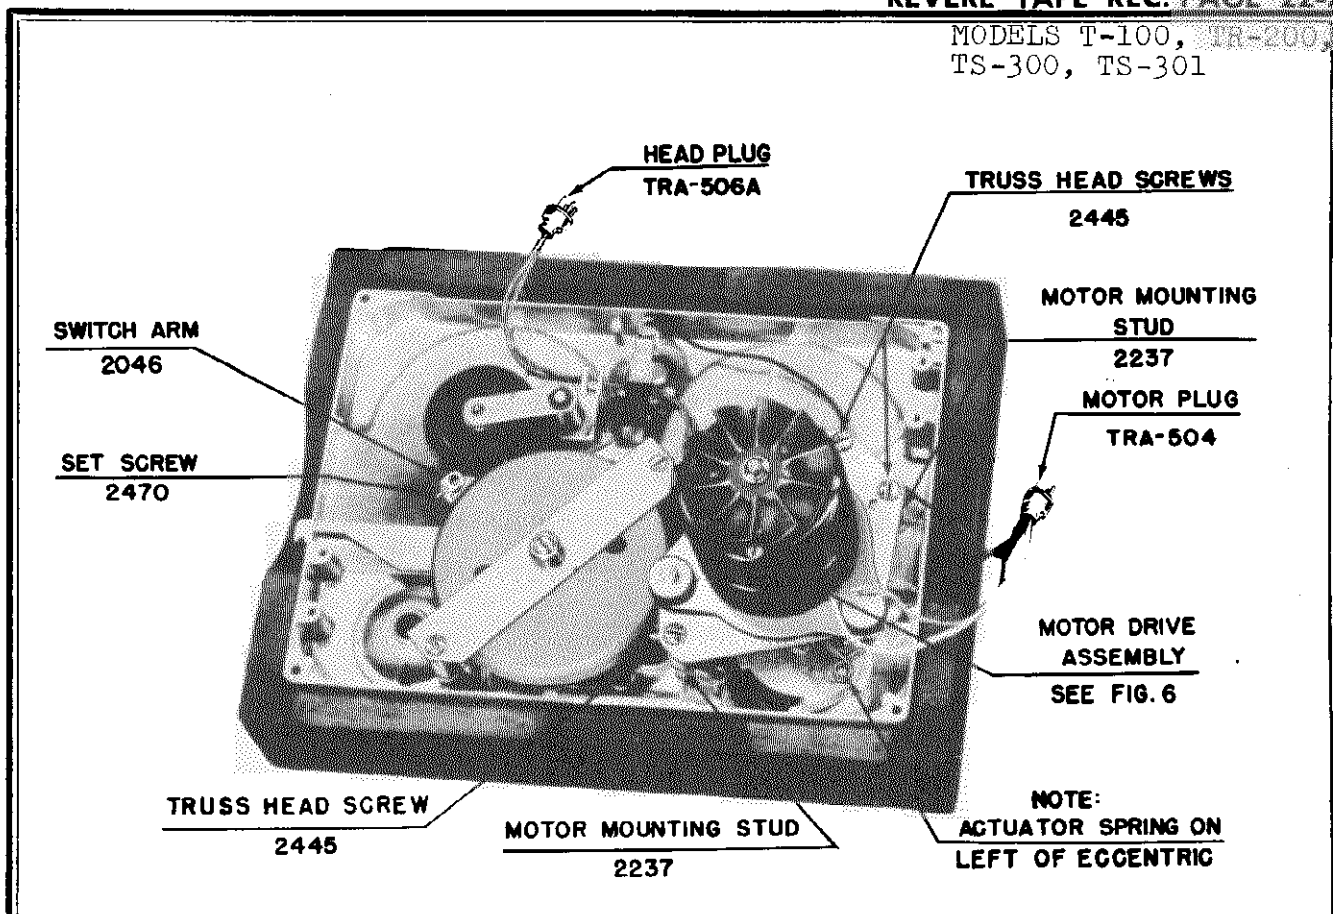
Bottom View of Recorder with Case and Amplifier Removed.
